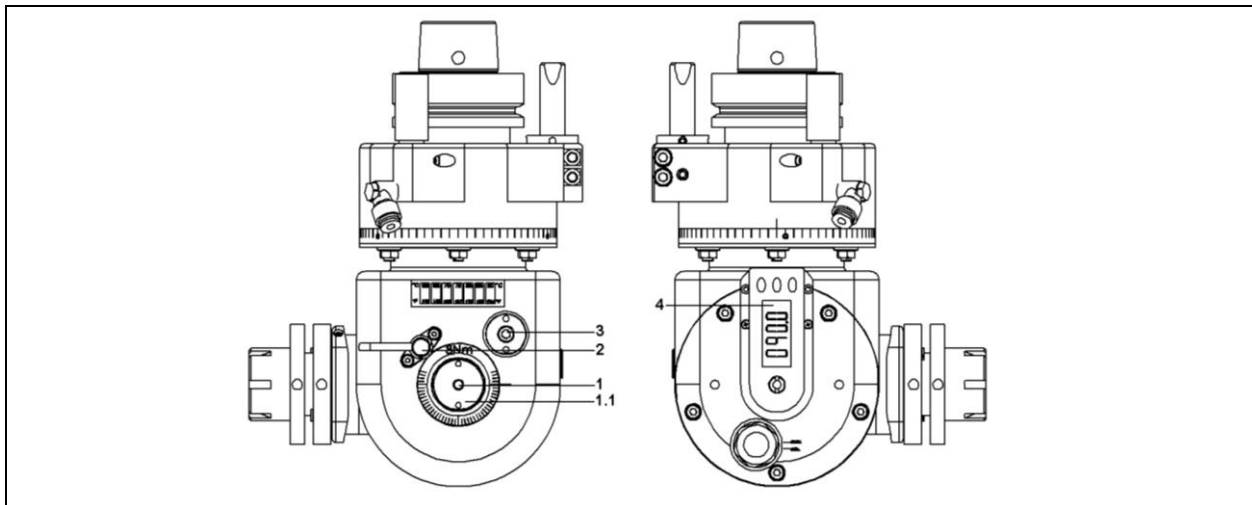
Angle adjustment spindle output Ultra Line Viso
